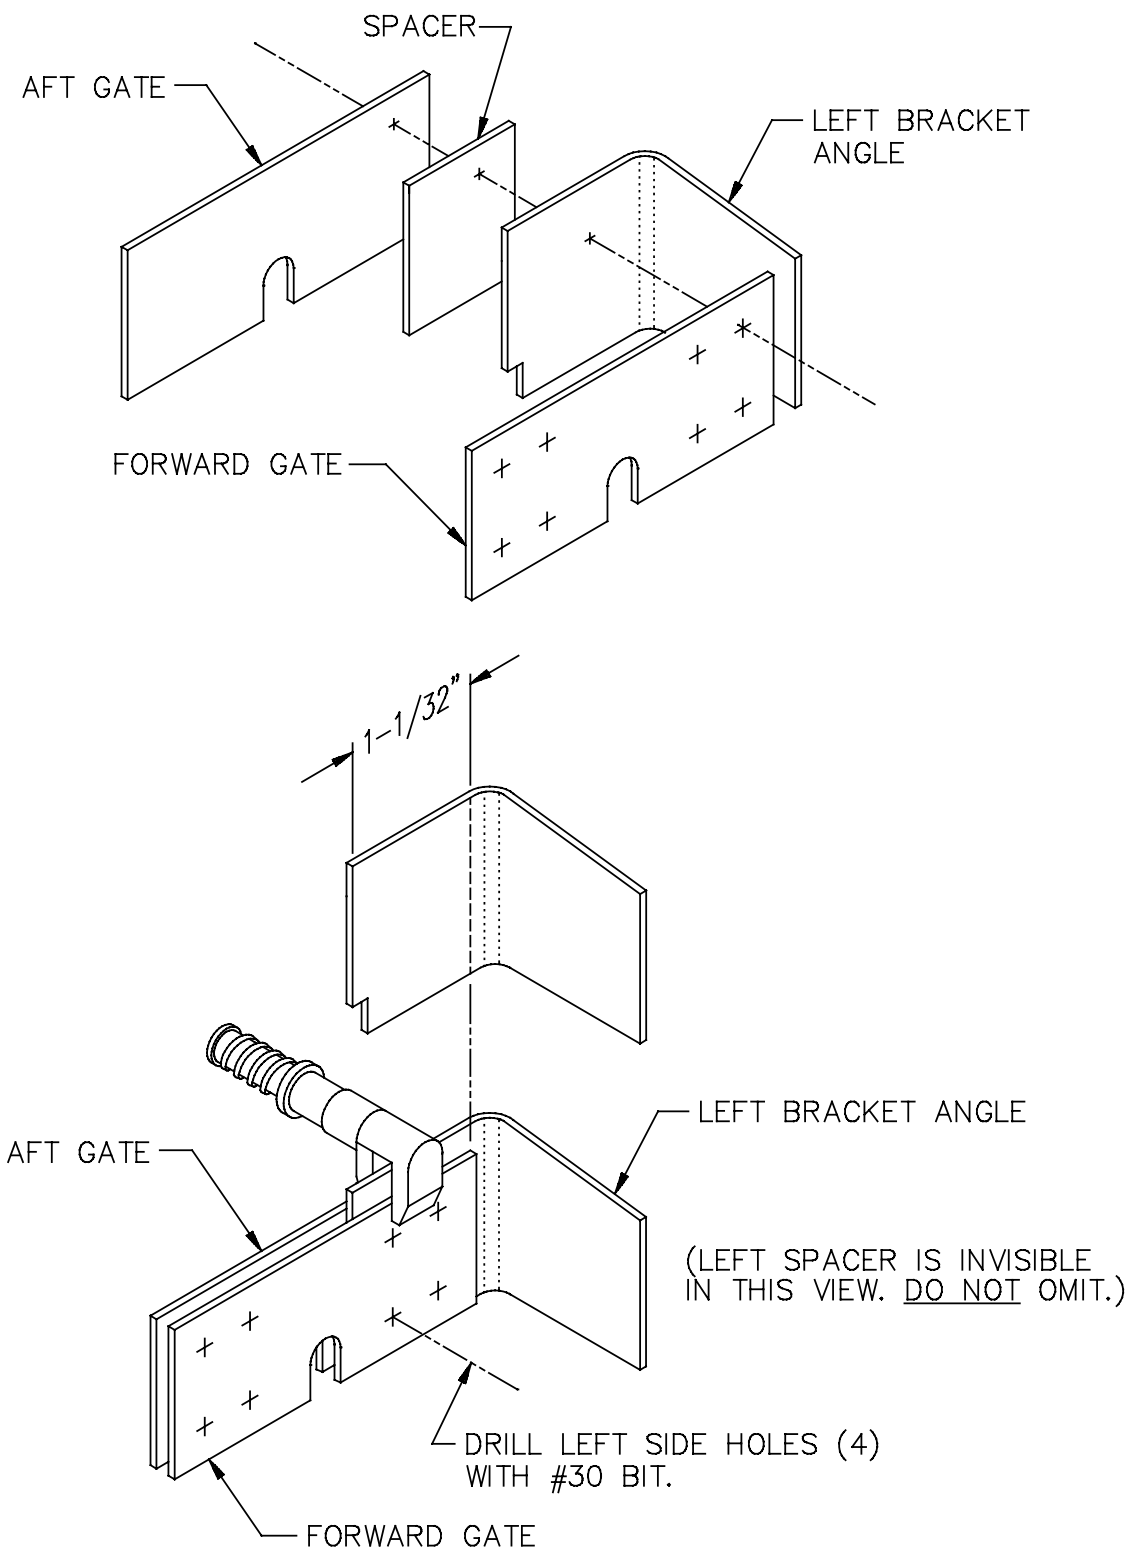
Drilling the Left-Side Trim Cable Bracket Rivet Holes
